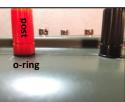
Connectors should fit in the hole snugly but go in easily. Widen the hole slightly with the drill, if necessary. Secure with nut and tighten with pliers.
